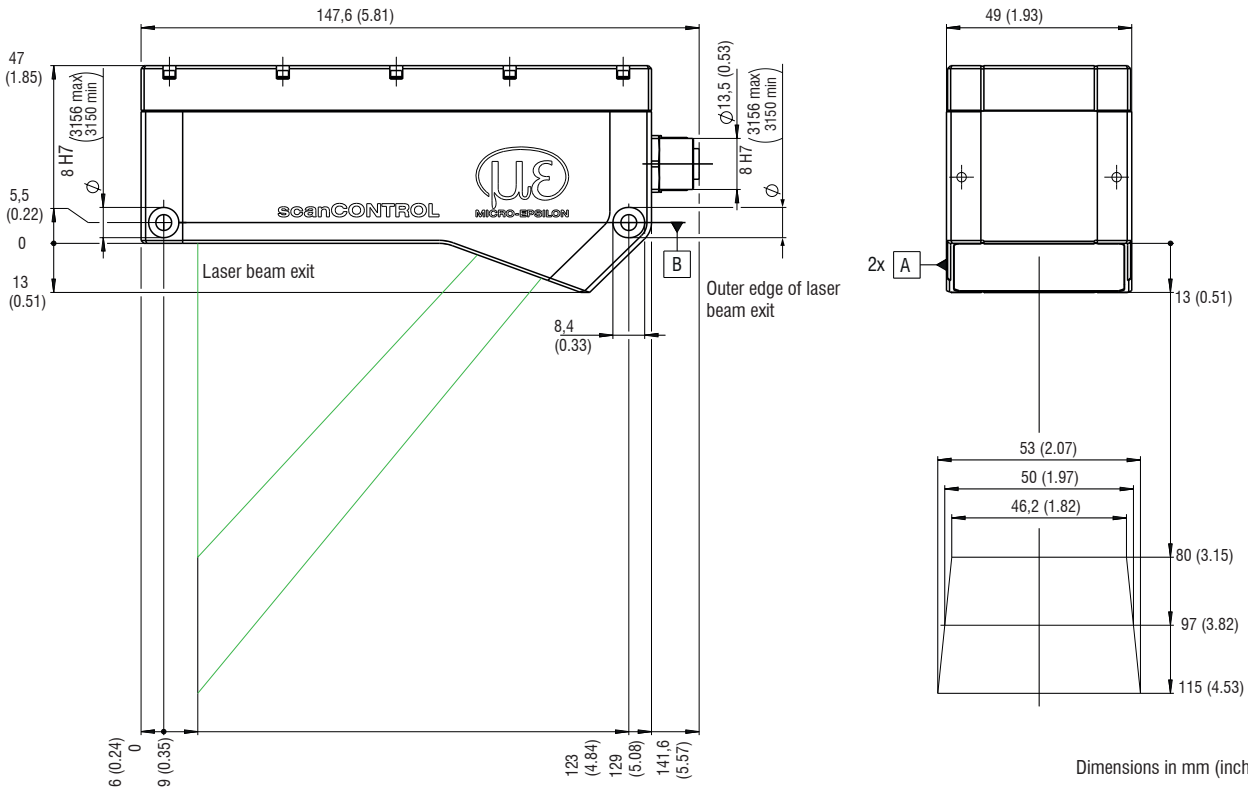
Dimensional drawing of scanCONTROL 8xxx-50 sensor
